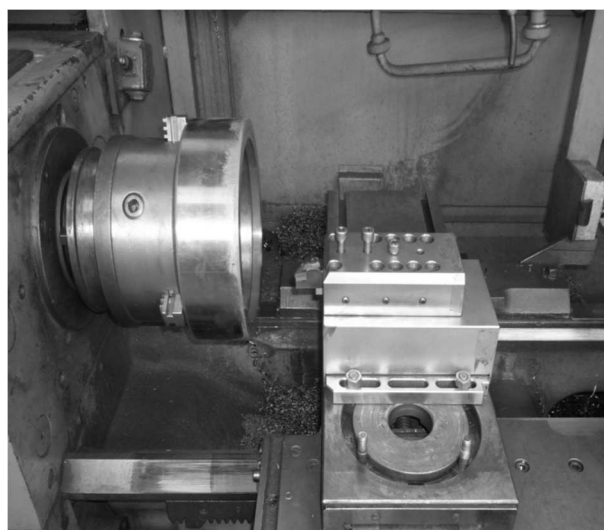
A view of the clamped workpiece with a KISTLER dynamometer on a lathe SUI 40
